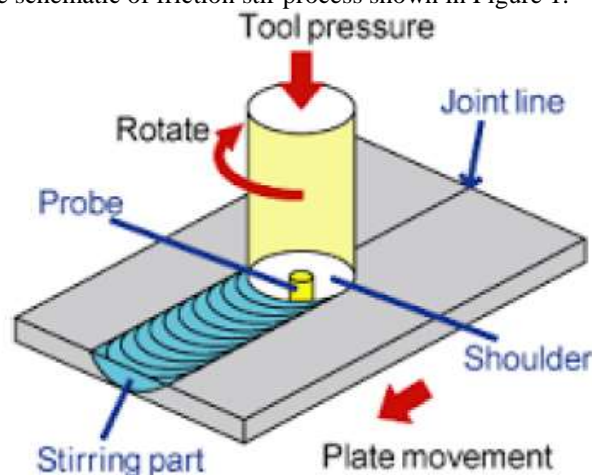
Schematic of Principle of Friction Stir Weld
